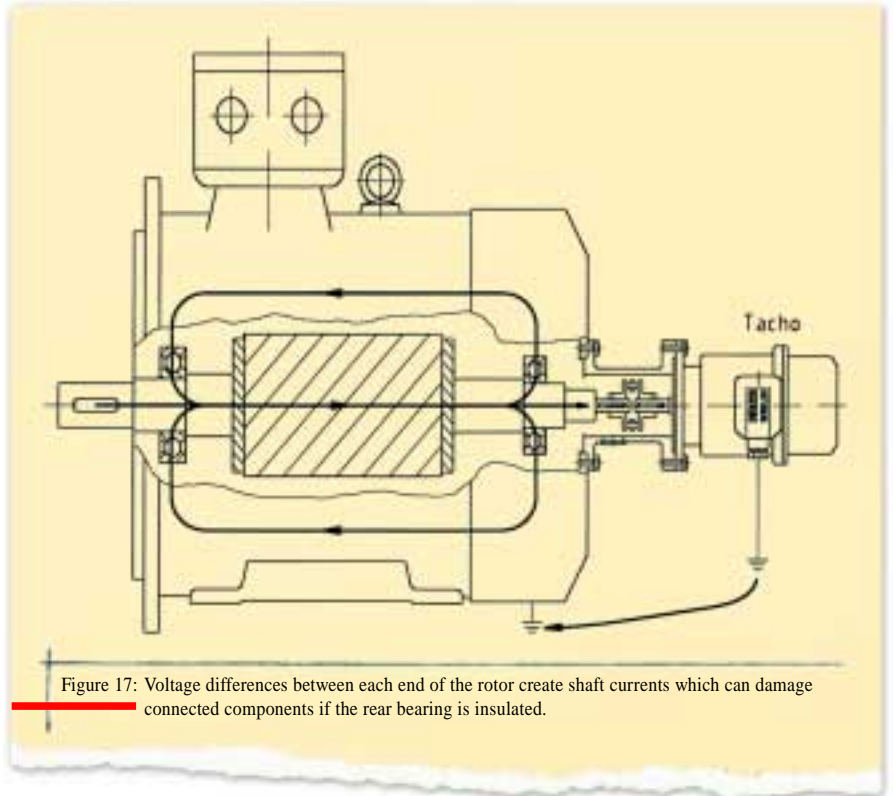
Voltage differences between each end of the rotor create shaft currents which can damage connected components if the rear bearing is insulated.
